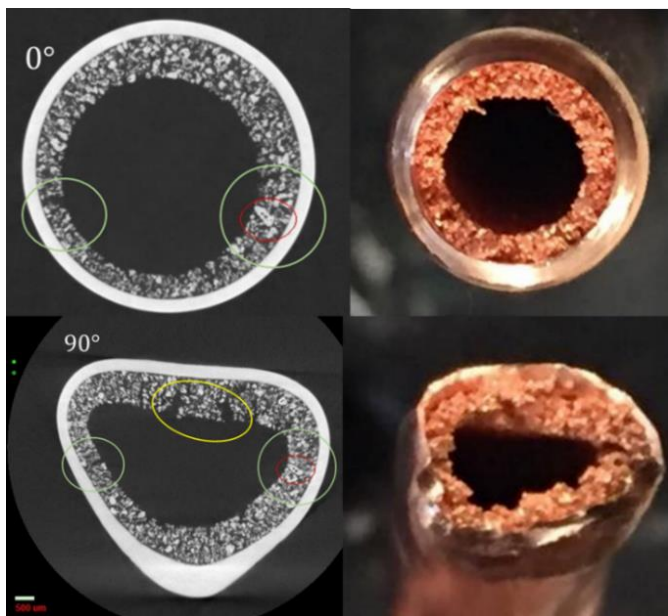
Images of cross-sections in a straight heat pipe and a heat pipe bend at 90°.
